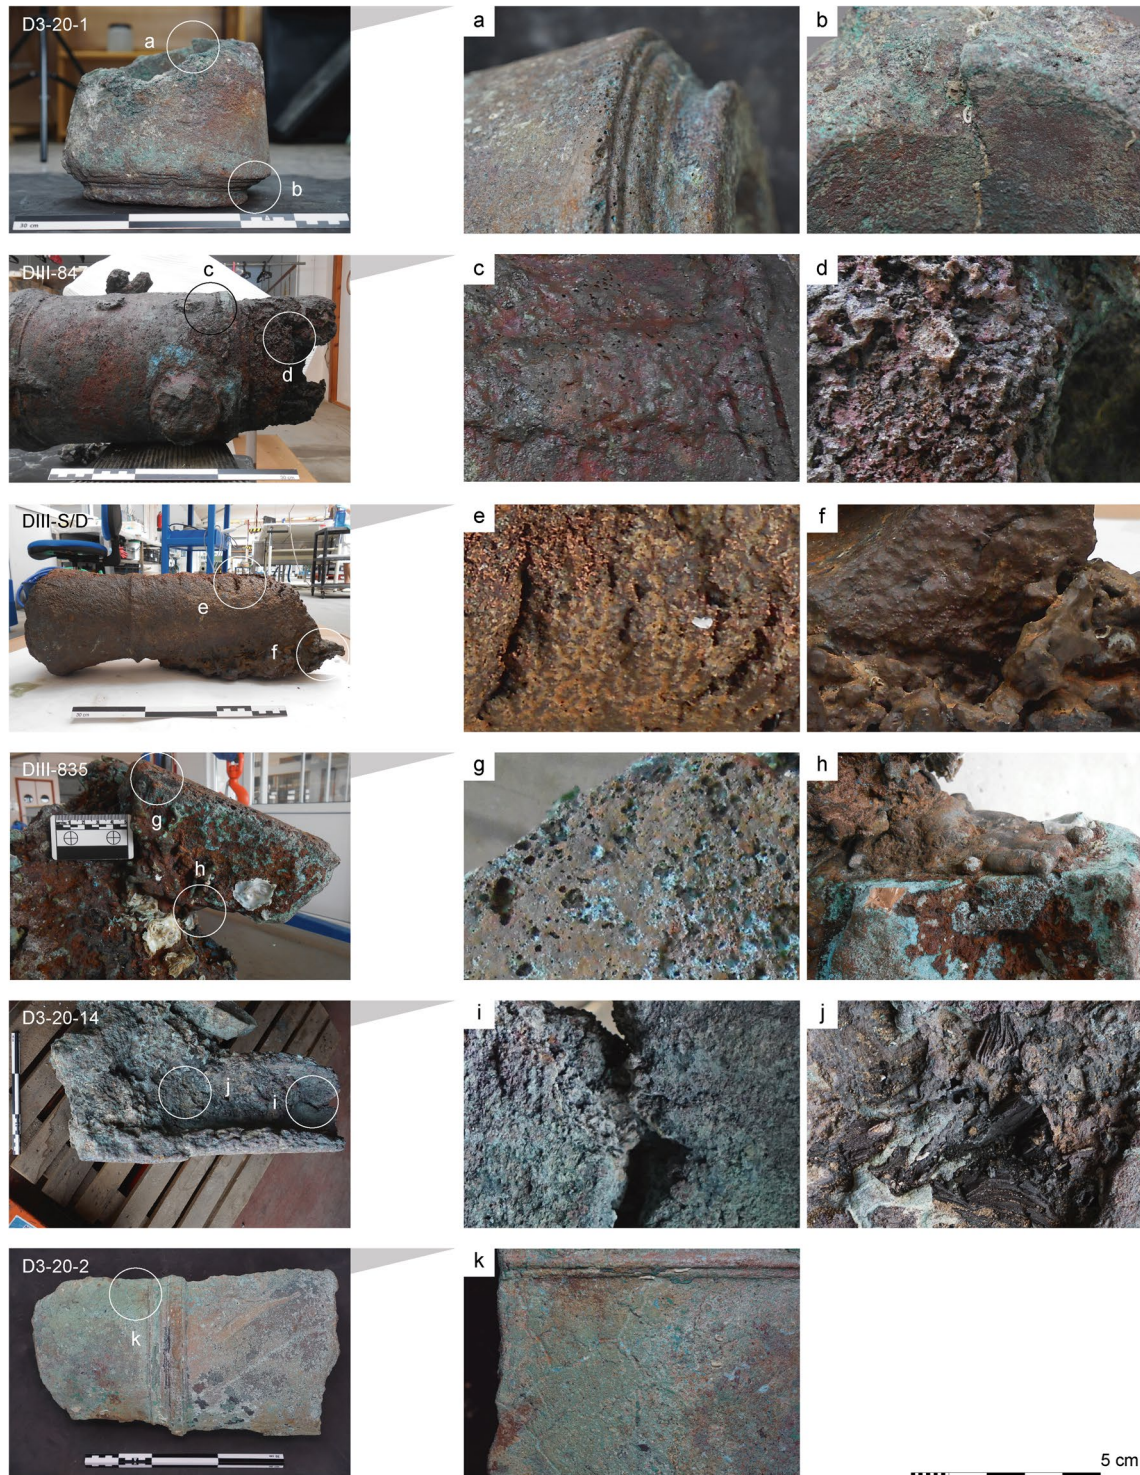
A detailed view of macroscopic casting defects in a selection of pieces: a gas porosity: pinholes; b cracks: cold tear; c vitrification; d sponginess; e open shrinkage cavities or pipes; f mould collapse; g
